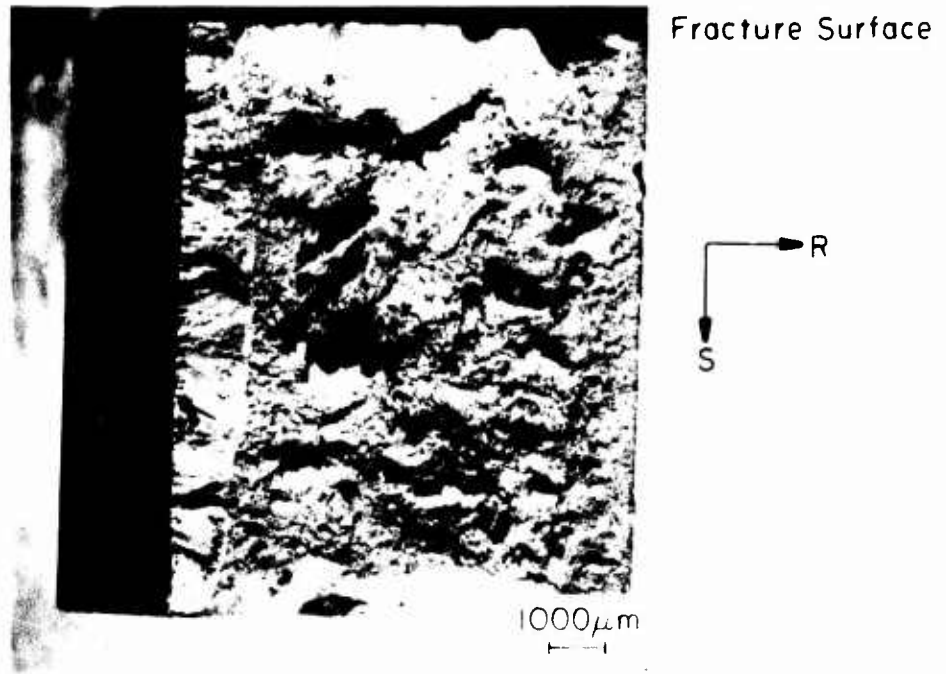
Alloy 227, sample 7LRC2. Fracture surface X8, crack path X500.
